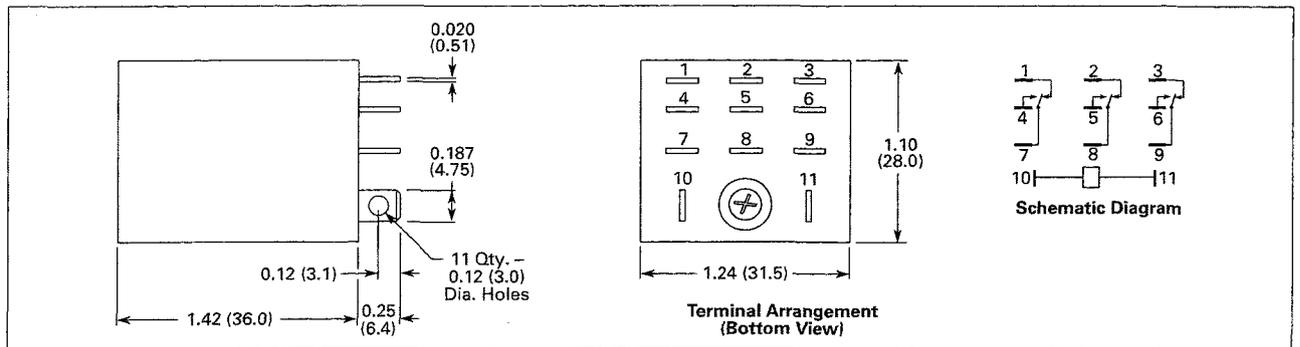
D7PR3 — Approximate Dimensions in Inches (mm)
